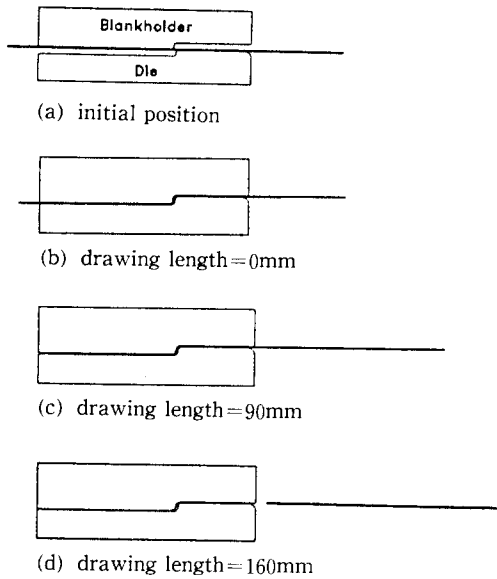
Drawn phenomena of specimen for each drawing length by drawing angle 0°
